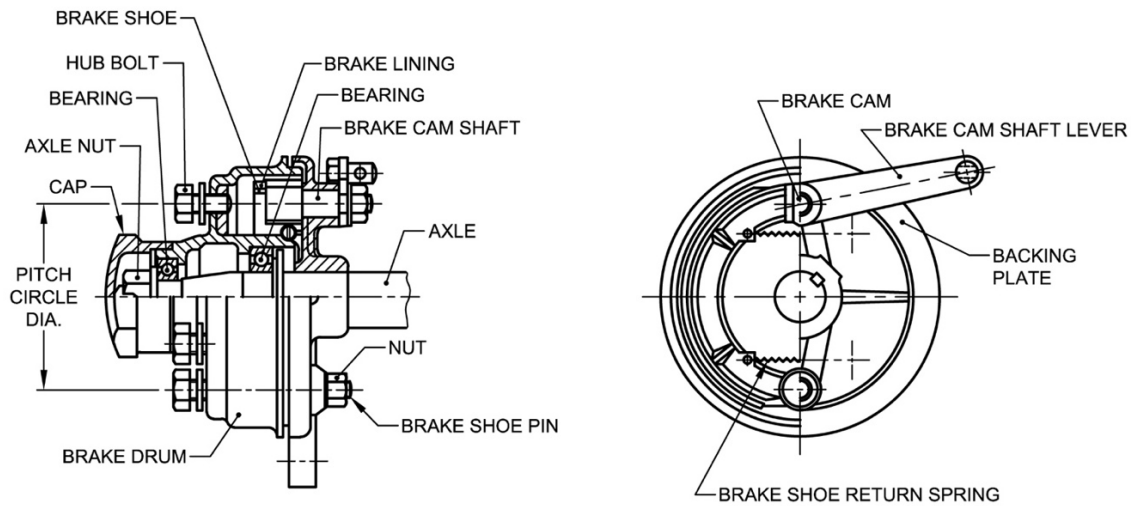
NOMENCLATURE OF AXLE ASSEMBLY
